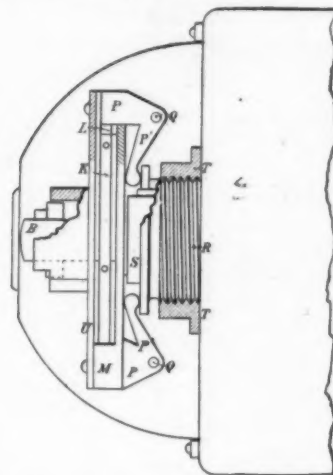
DETAIL OF REWINDING CLUTCH OF EVER-READY SELF-STARTER.
